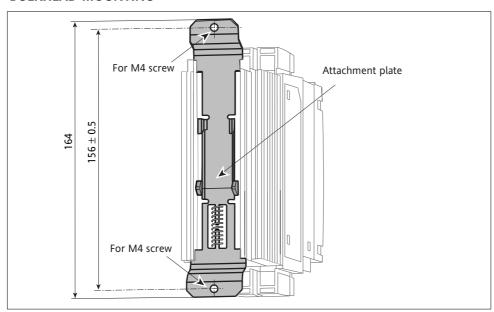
Mounting the unit using an attachment plate for bulkhead mounting (16 A to 63 A, rear view)
